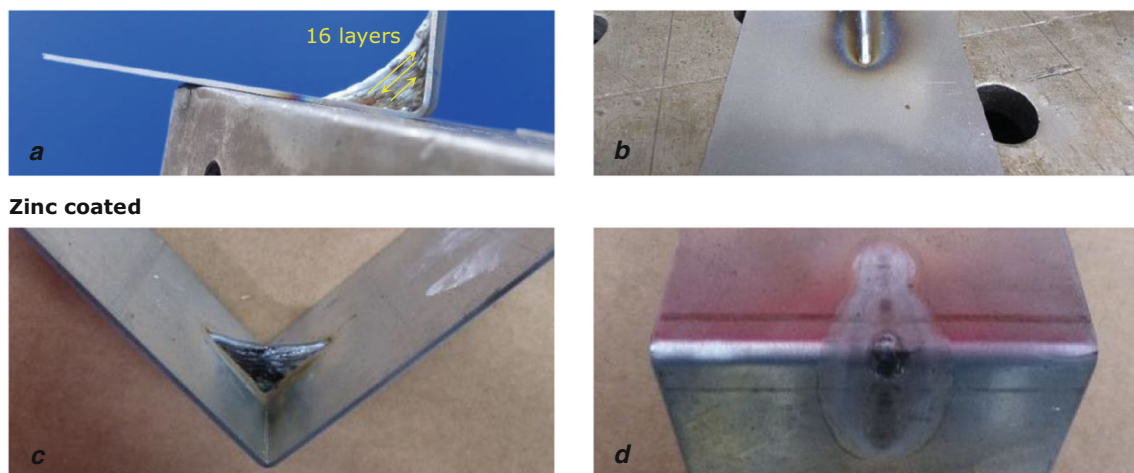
Welding results of additive manufacturing of a gusset plate on steel sheets of 2 mm thickness: uncoated (a and b), zinc coated (c and d)
